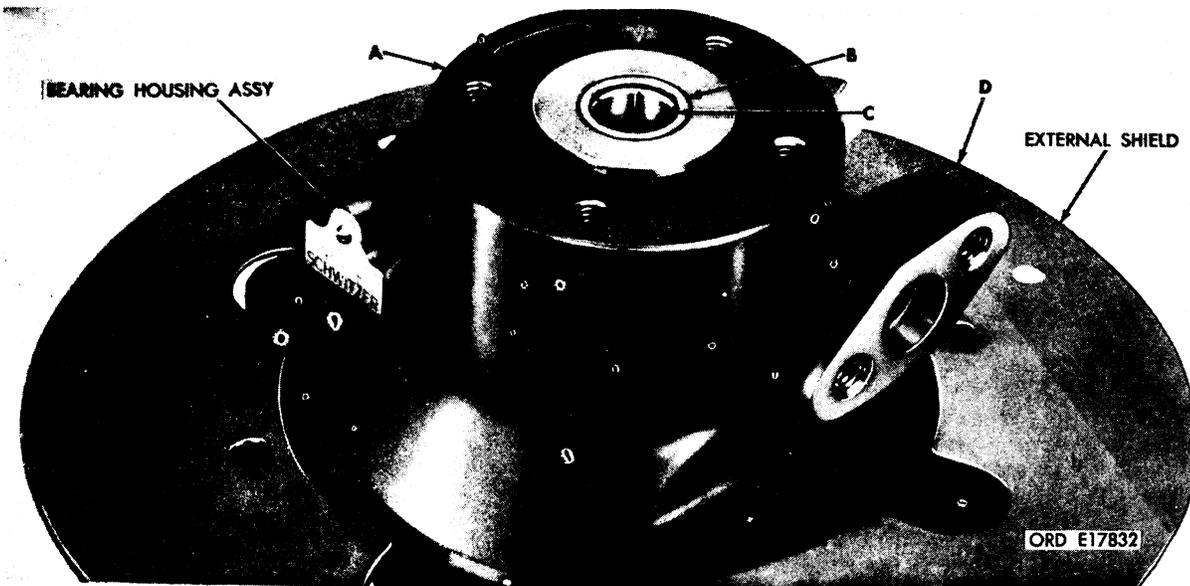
REMOVING FRONT AND REAR OIL RETAINERS AND ASSOCIATED PARTS - TURBOCHARGERS 10912638 AND 53591-C-139552.
